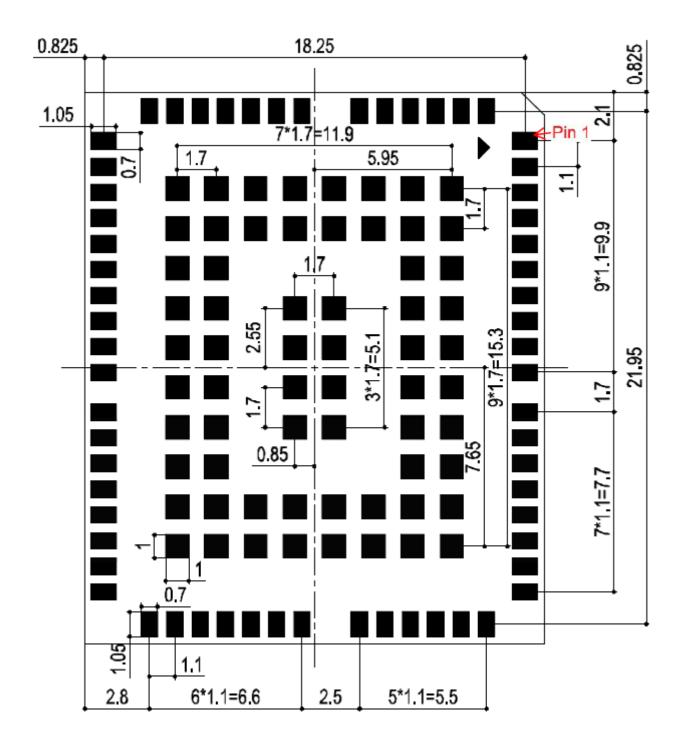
Bottom Dimensions (Bottom View, Unit: mm)
